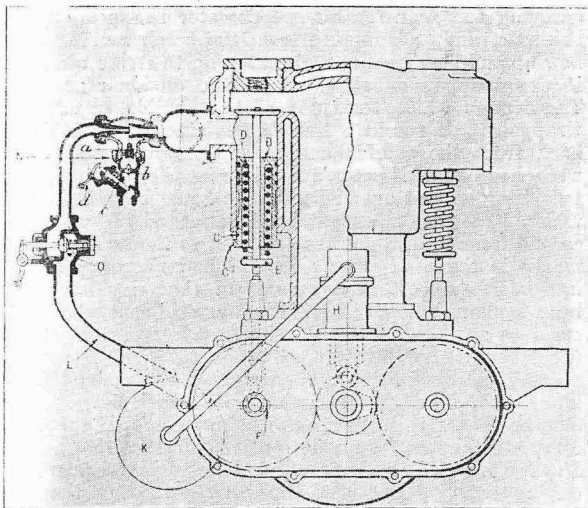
The Gore four-stroke engine showing air compressor, reservoir, vaporizing device and balance valve.
